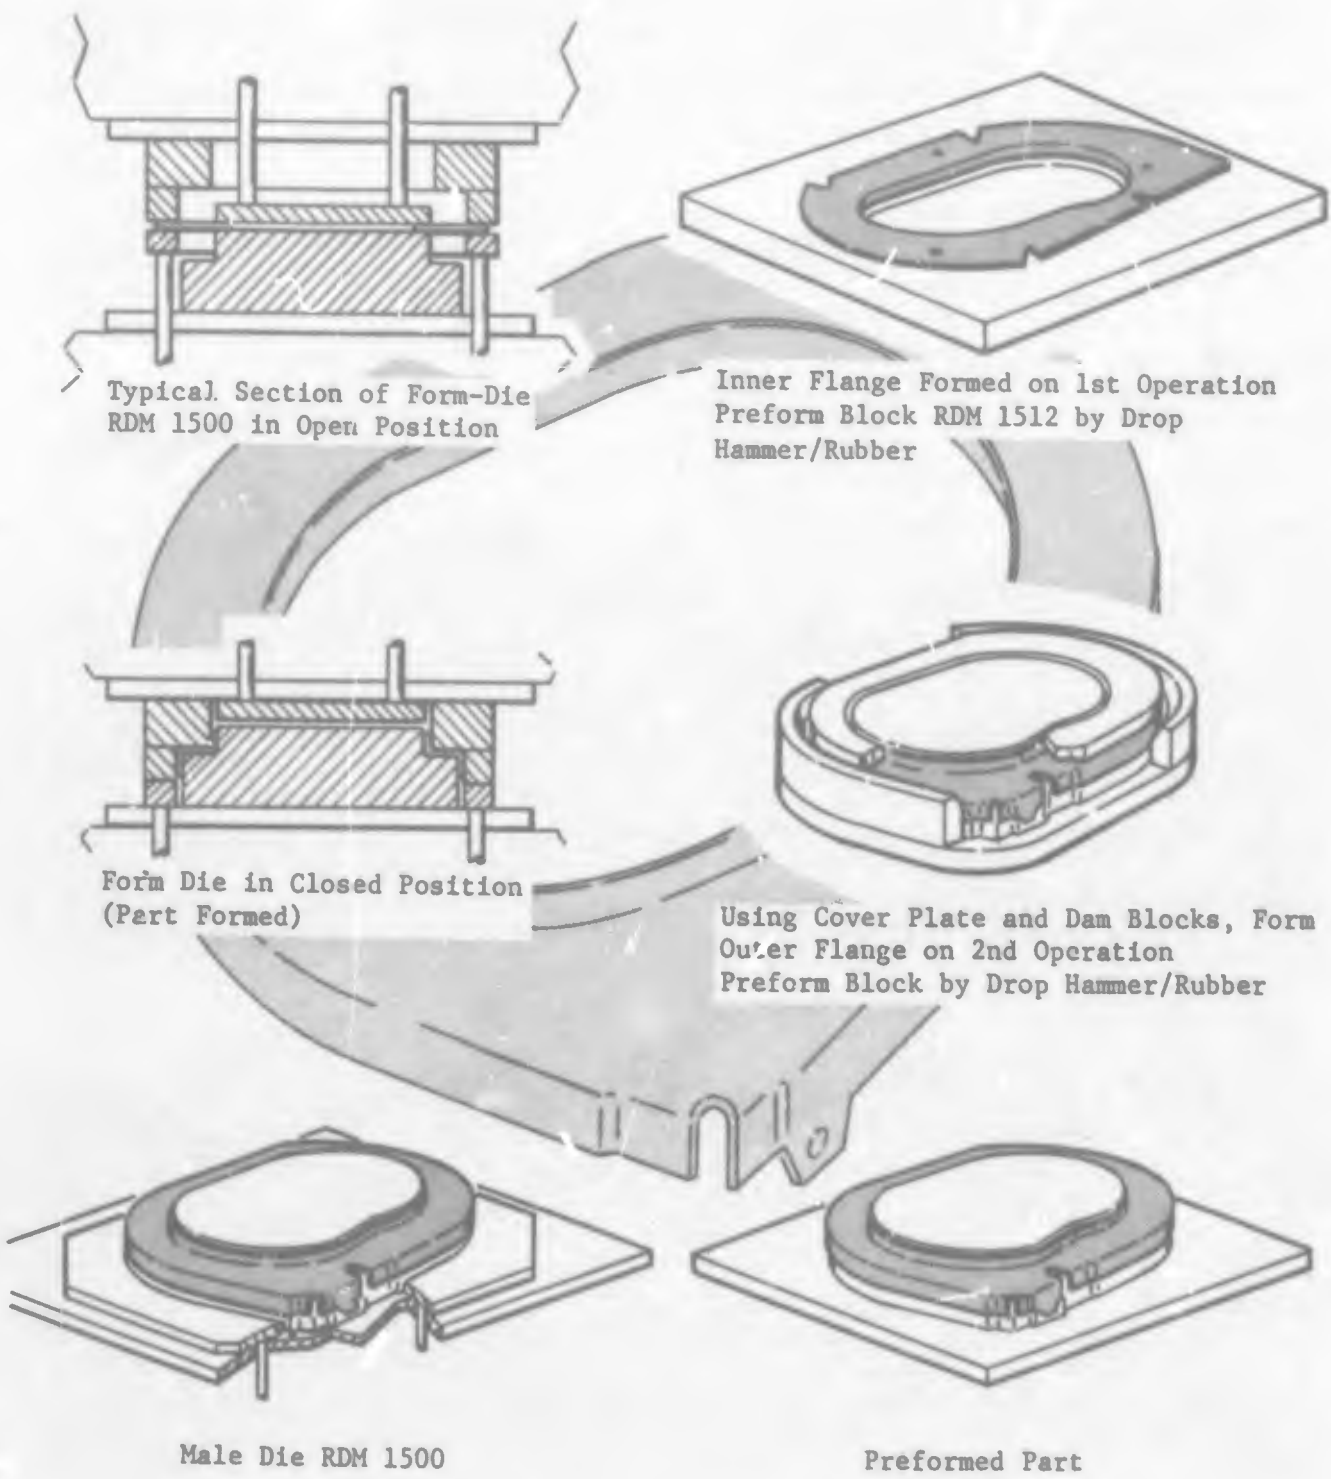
Forming Tools for Test Part #1 - Tail Cone Frame
